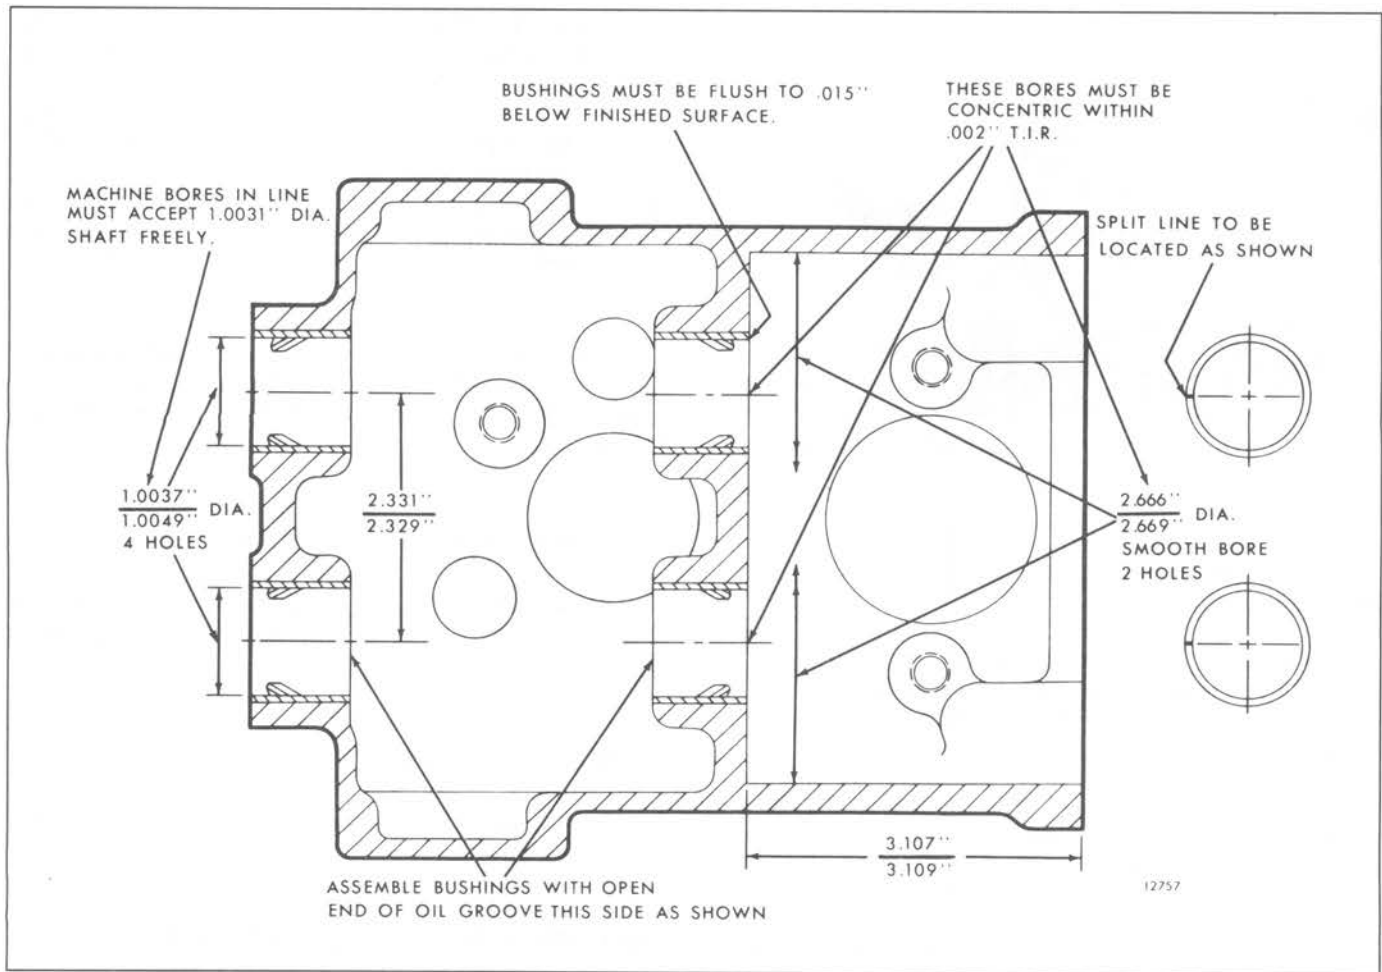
Diameter and Location of Bushing in Oil Pump (12V-92 and 16V-92 Engines)
